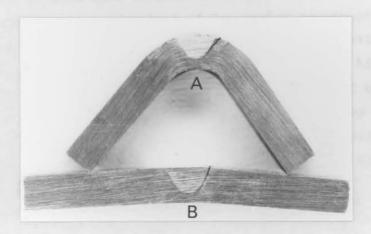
Hot rolled bead-on-plate 3CR12 bent specimens welded with a 316L (A) and E3CR12 (B) filler metal. Note the brittle cracks in the coarse grained HAZ adjacent to the fusion line.
